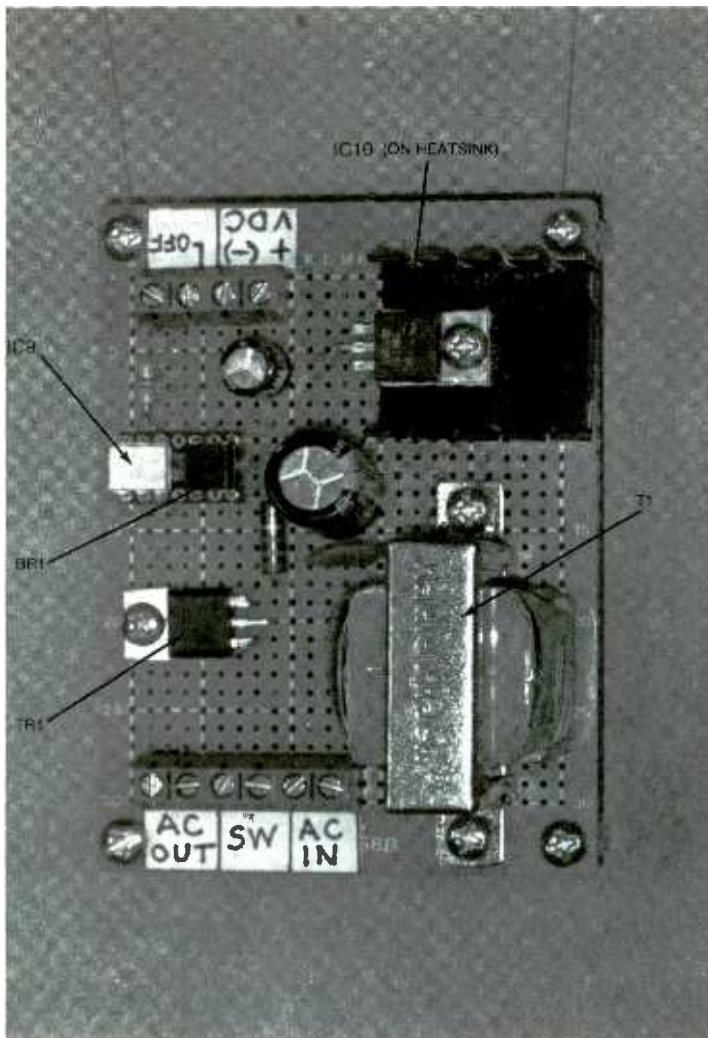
The power module is built using similar techniques to the control module. Note that you'll have to drill several holes for screw-mounted items, such as T1 and IC10.
